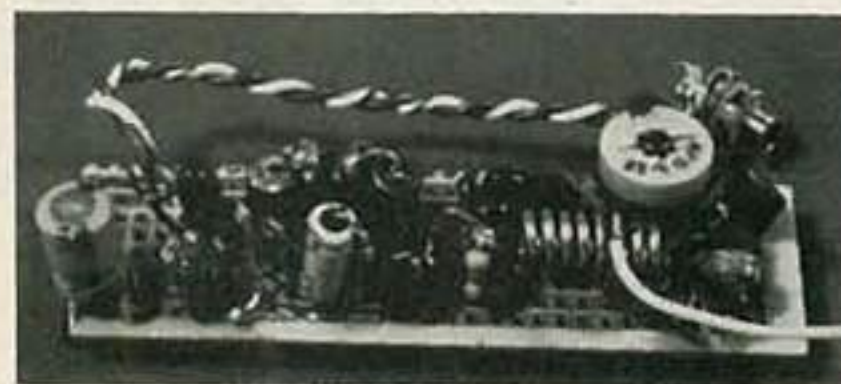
PROTOTYPE TRANSMITTER built on a small piece of board. Any construction technique may be used.
